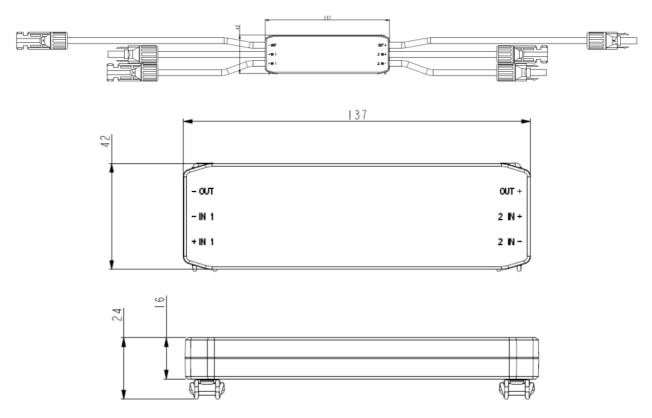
&3.7&3.8 Dimensions of TSOL-RSDM-DD
